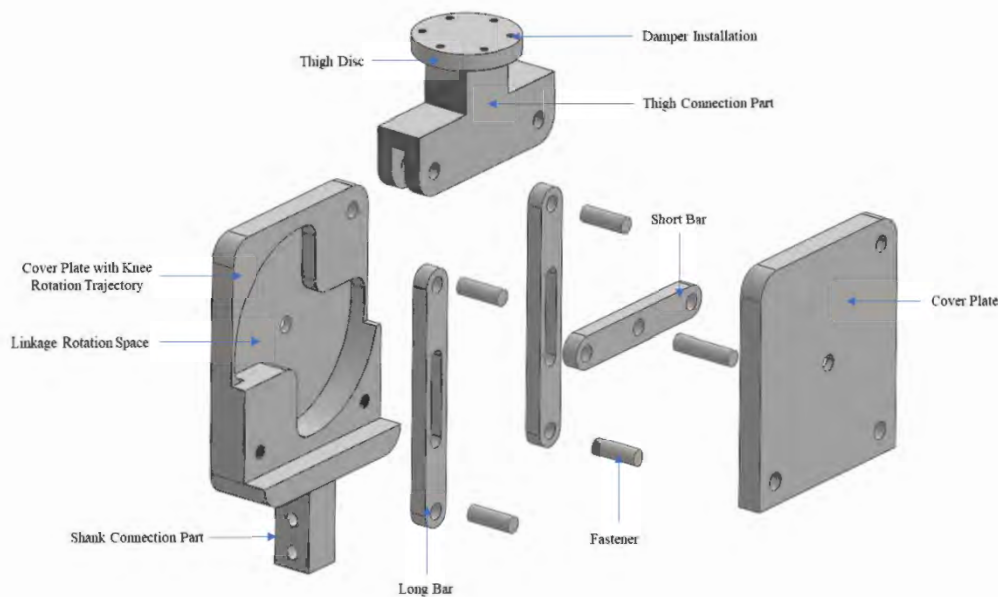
CAD design of robot Knee Joint with Four Bar Linkage Mechanism.
